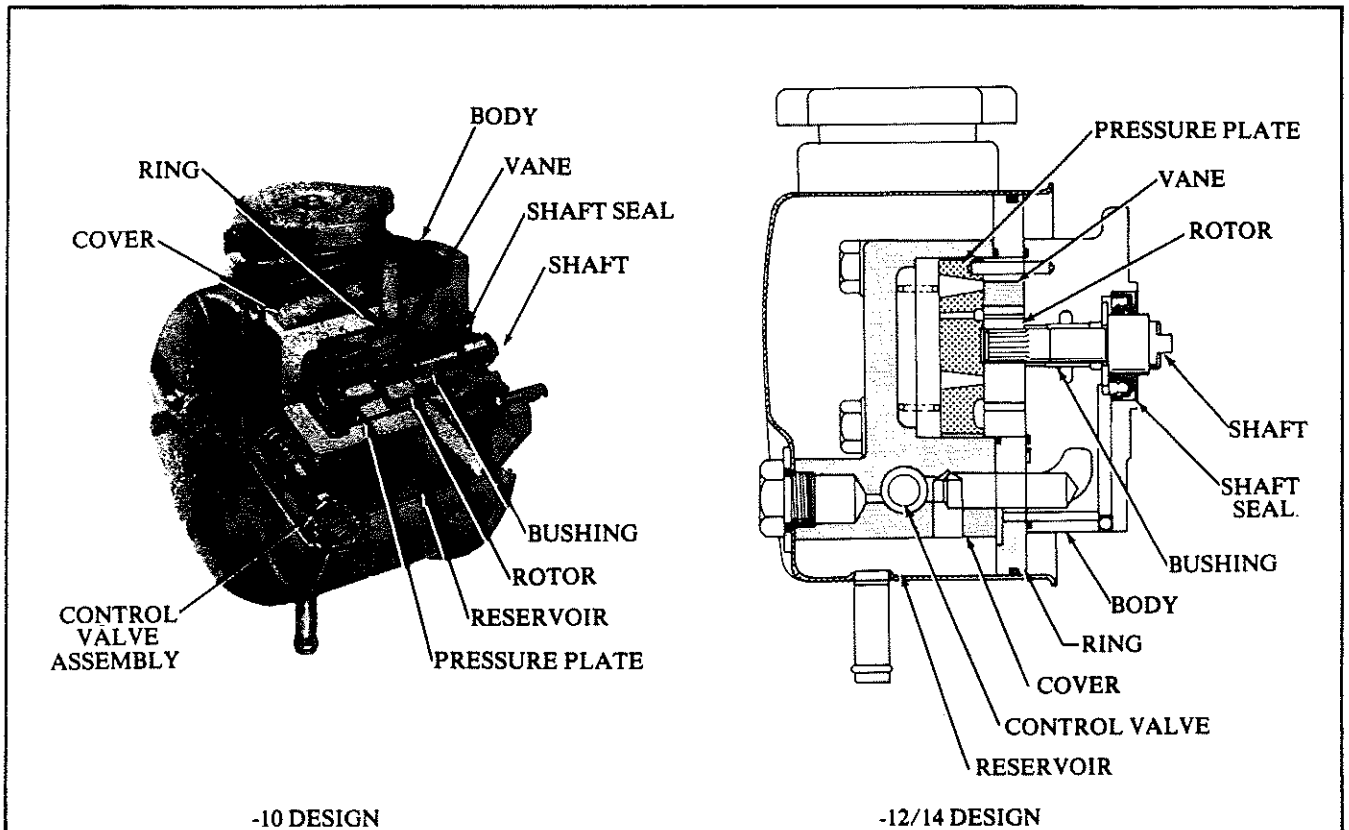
VTM40 Pump - Cutaway and Sectional Views
